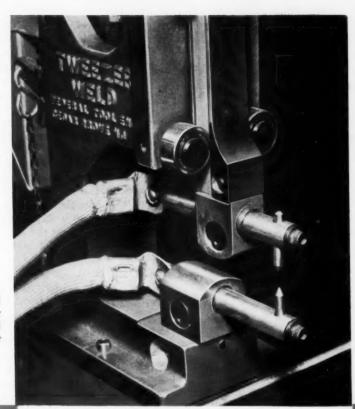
Original bench-model spot welder was a Tweezer Weld unit built by Federal Tool Engineering Co. of Cedar Grove, N. J.
